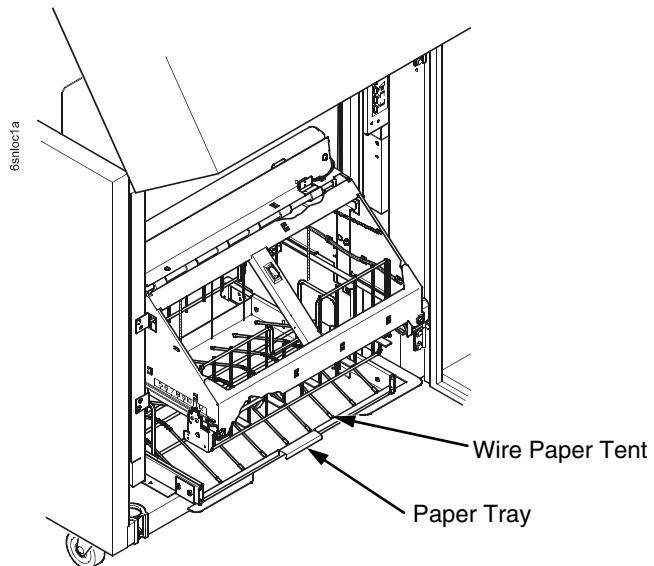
Rear View of Cabinet Model Showing Power Stacker Components
